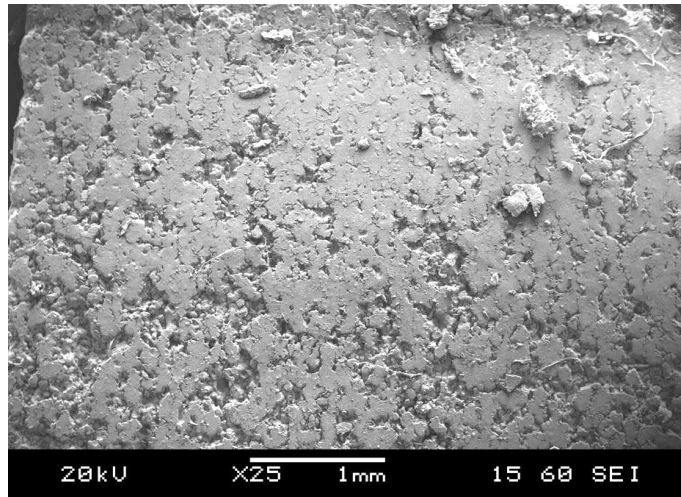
lubricated wear on EOS PEEK HP3 gear tooth
